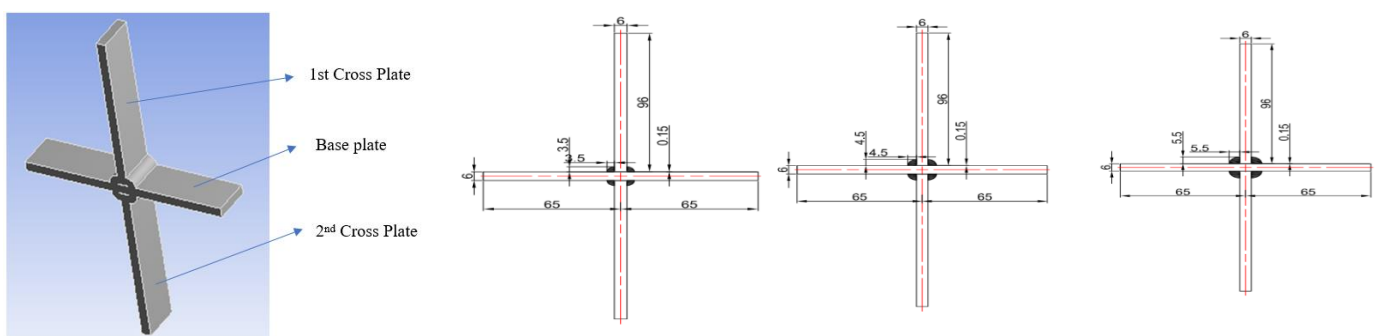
convex welded joint geometry with for 3.5x3.5, 4.5x4.5 and 5.5x5.5 with considered dimensions.
